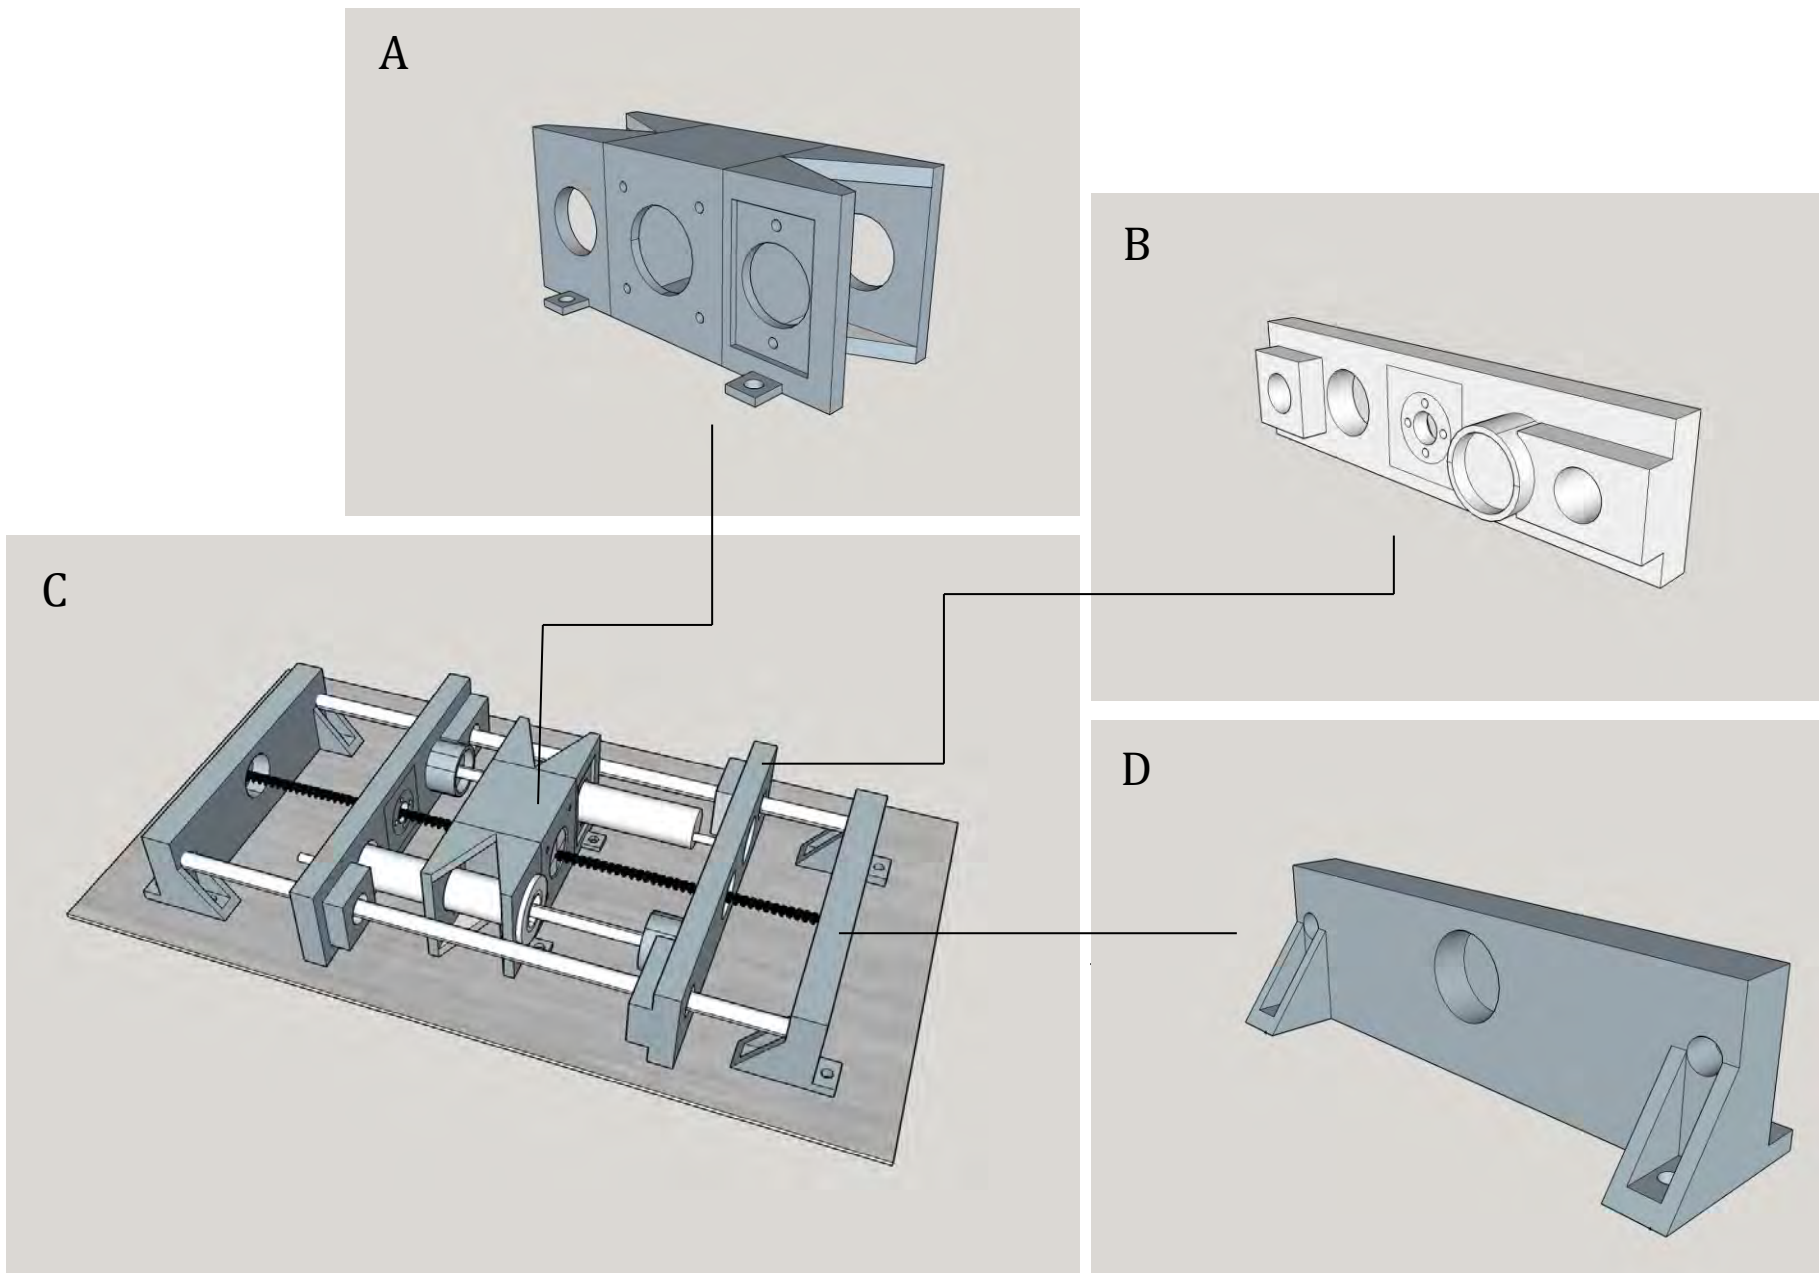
CAD model of the 3D printed components of the media pump system, and their place within the completed setup. A: Central motor and syringe mount; B: Connective bar; C: Completed media pump setup; D: Outer bracket.
